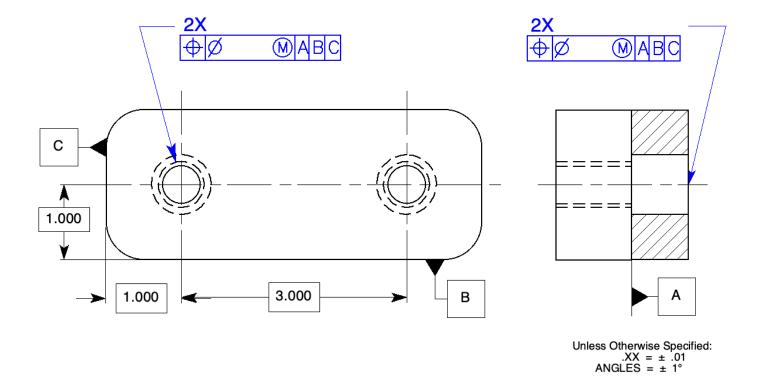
Fixed fastener drawing: Probs. 7 through 10.
